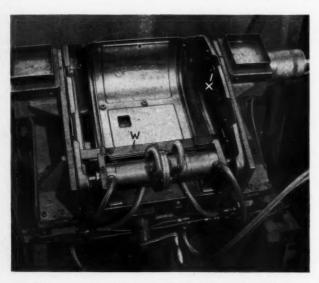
The centre section sub-assembly and the side shields are here seen in position and clamped, in readiness for spot-welding
